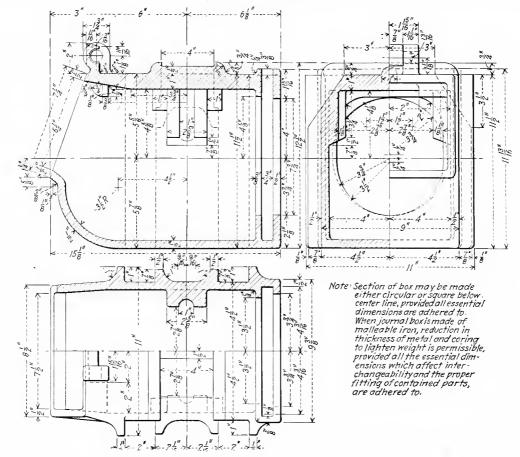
M. C. B. Standard Box for 5 in. by 9 in. Passenger Train Car Journal. (M. C. B. Sheet 8A.)
